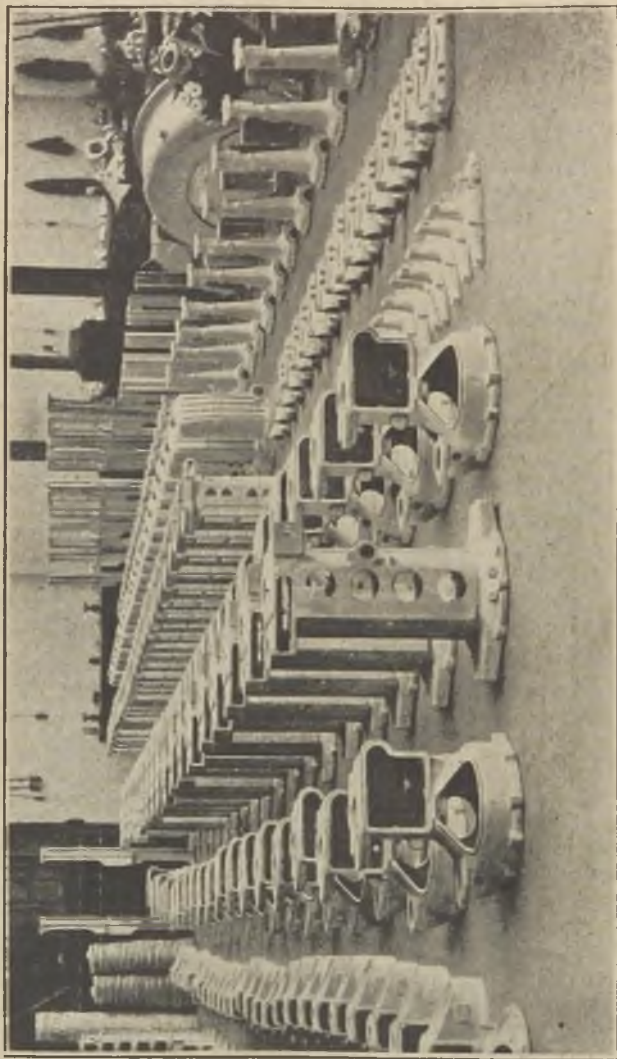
A SELECTION OF MACHINE MOULDED CASTINGS MADE BY MESSRS. WILLIAM MILLS, LIMITED,
